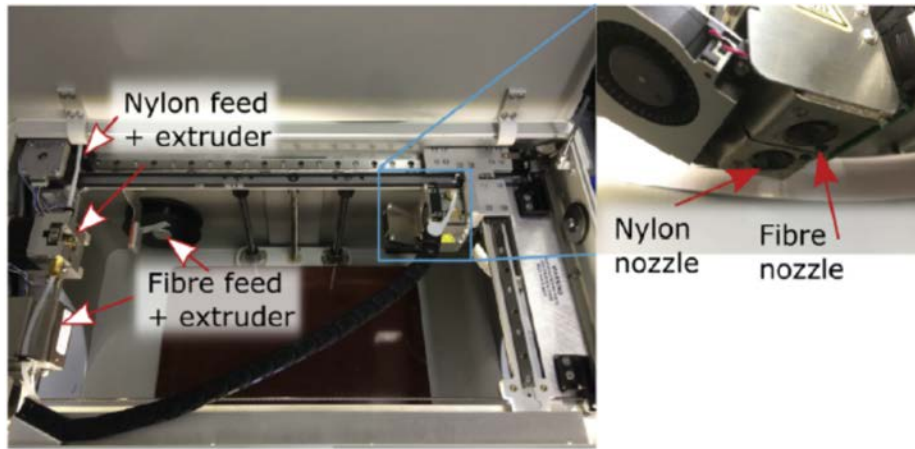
Photography of Markforged® 3D printed showing PA6 extruder and continuous fibers extruder (left) with a focus on dual nozzle head (right) [19].
